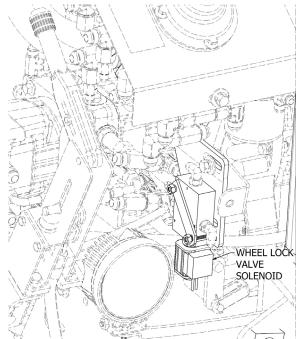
Wheel Lock Valve Solenoid, Earlier Models
